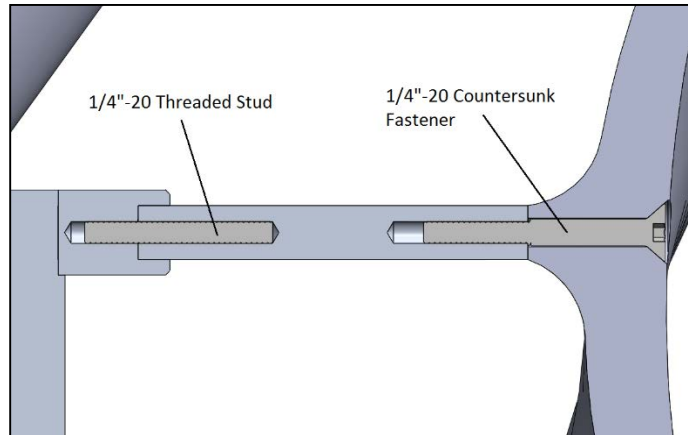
Cross sectional view of blade mounted to turbine chassis.
